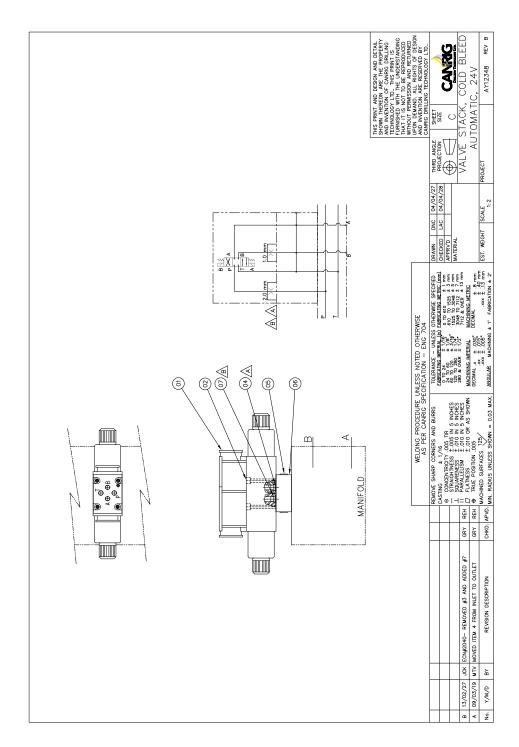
24V Automatic Cold Bleed Valve Stack (Canrig Drawing AY12348B)
